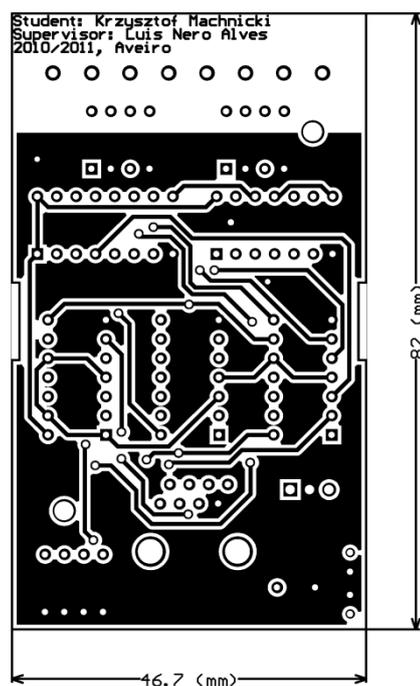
EXTENSION BOARD'S TOP LAYER.
